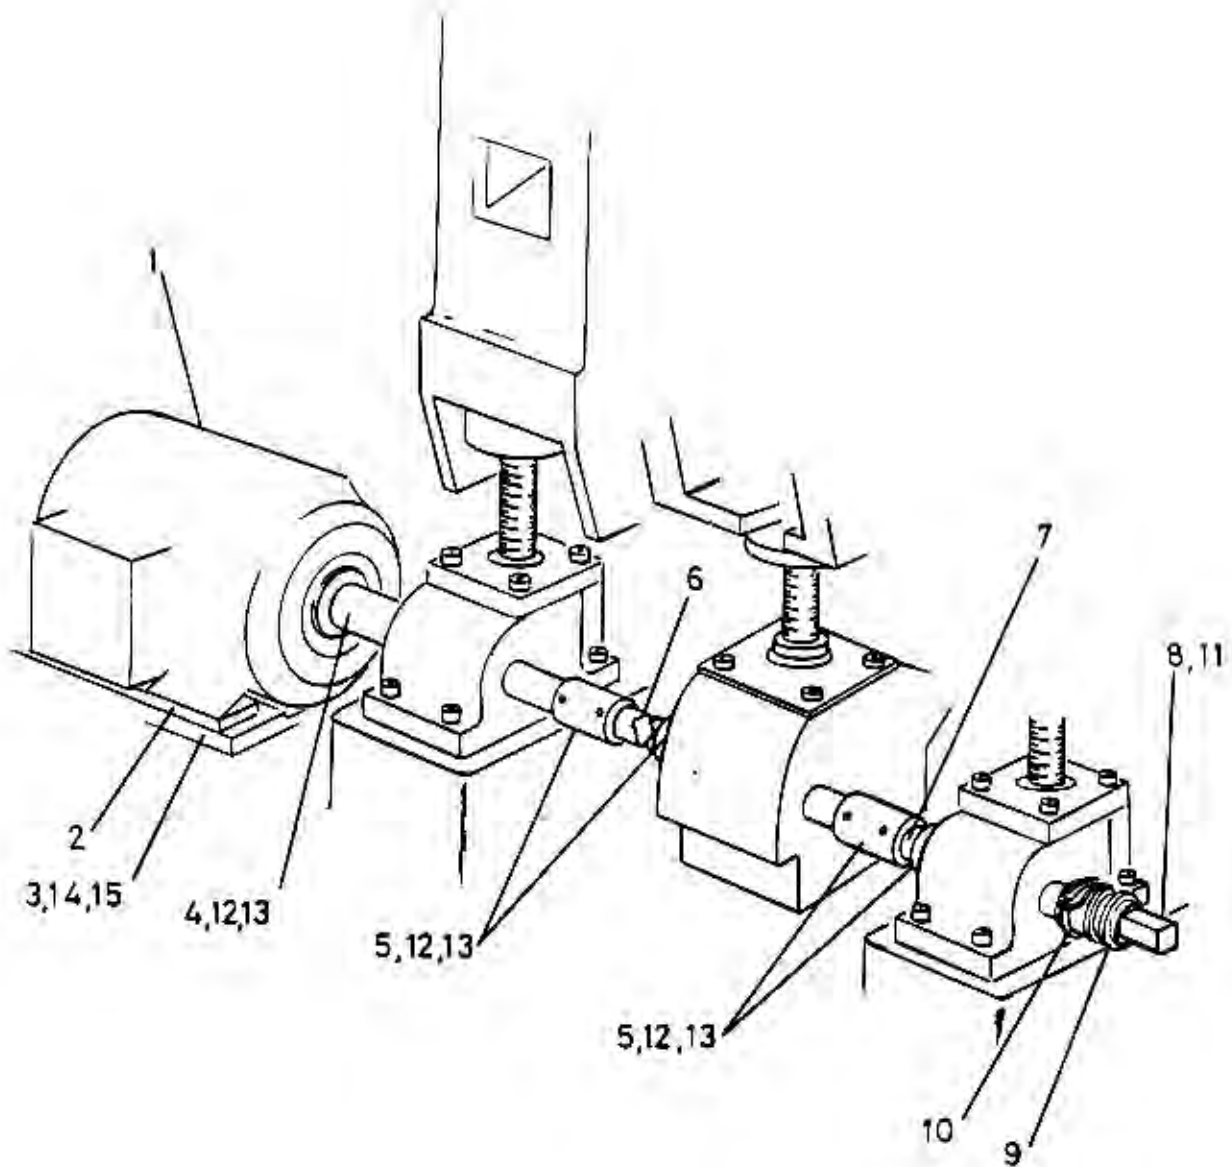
DRIVE SHAFTS TO RISE AND FALL FOR BEAM AND TOP HEAD
